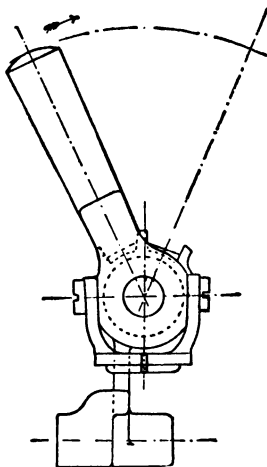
End view of parts A, B, and C of Grover's Indicator Gear.
